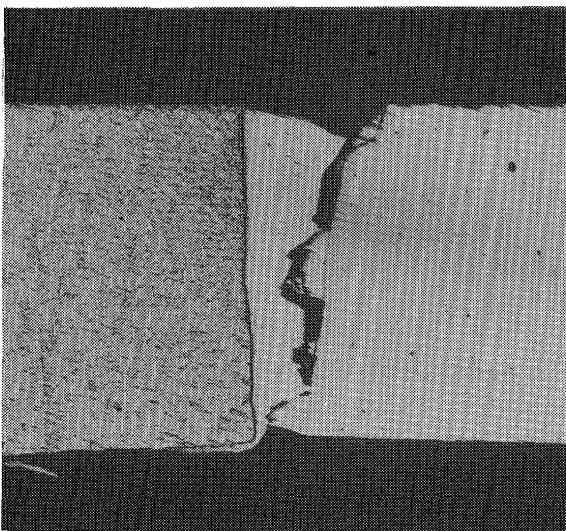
An example of welded joint in cross-section after tensile tested
